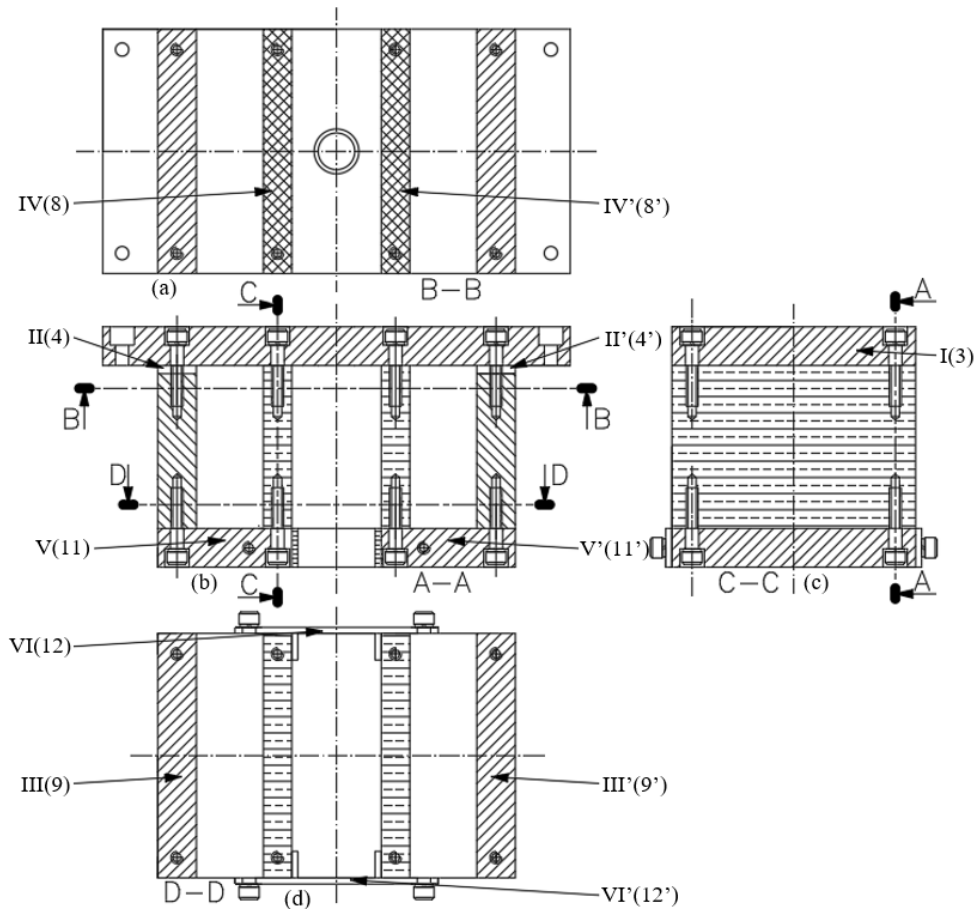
Technical assembly drawing (in section) of the fixed ferromagnetic circuit
